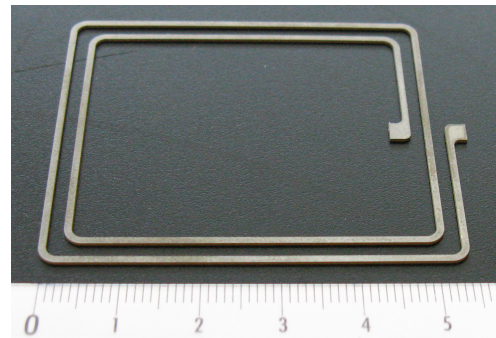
Tungsten plane winding manufactured by electric-discharge machining, thickness 0.5 mm.
